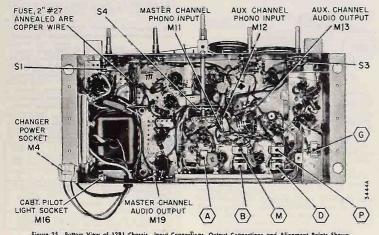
, Bottom View of 12B1 Chassis, Input Connections, Output Connections and Alignment Points Shown.
